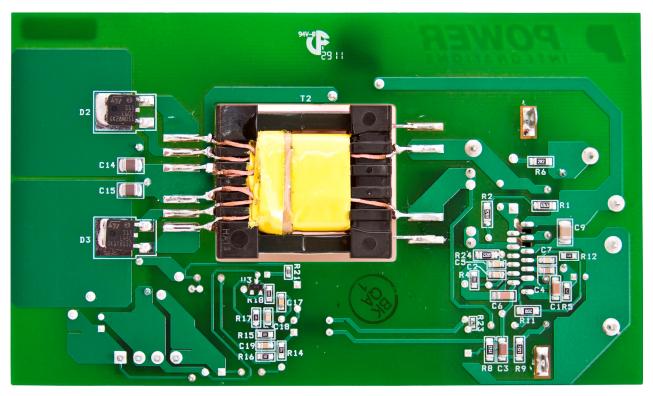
Populated Circuit Board Photograph, Bottom View.
